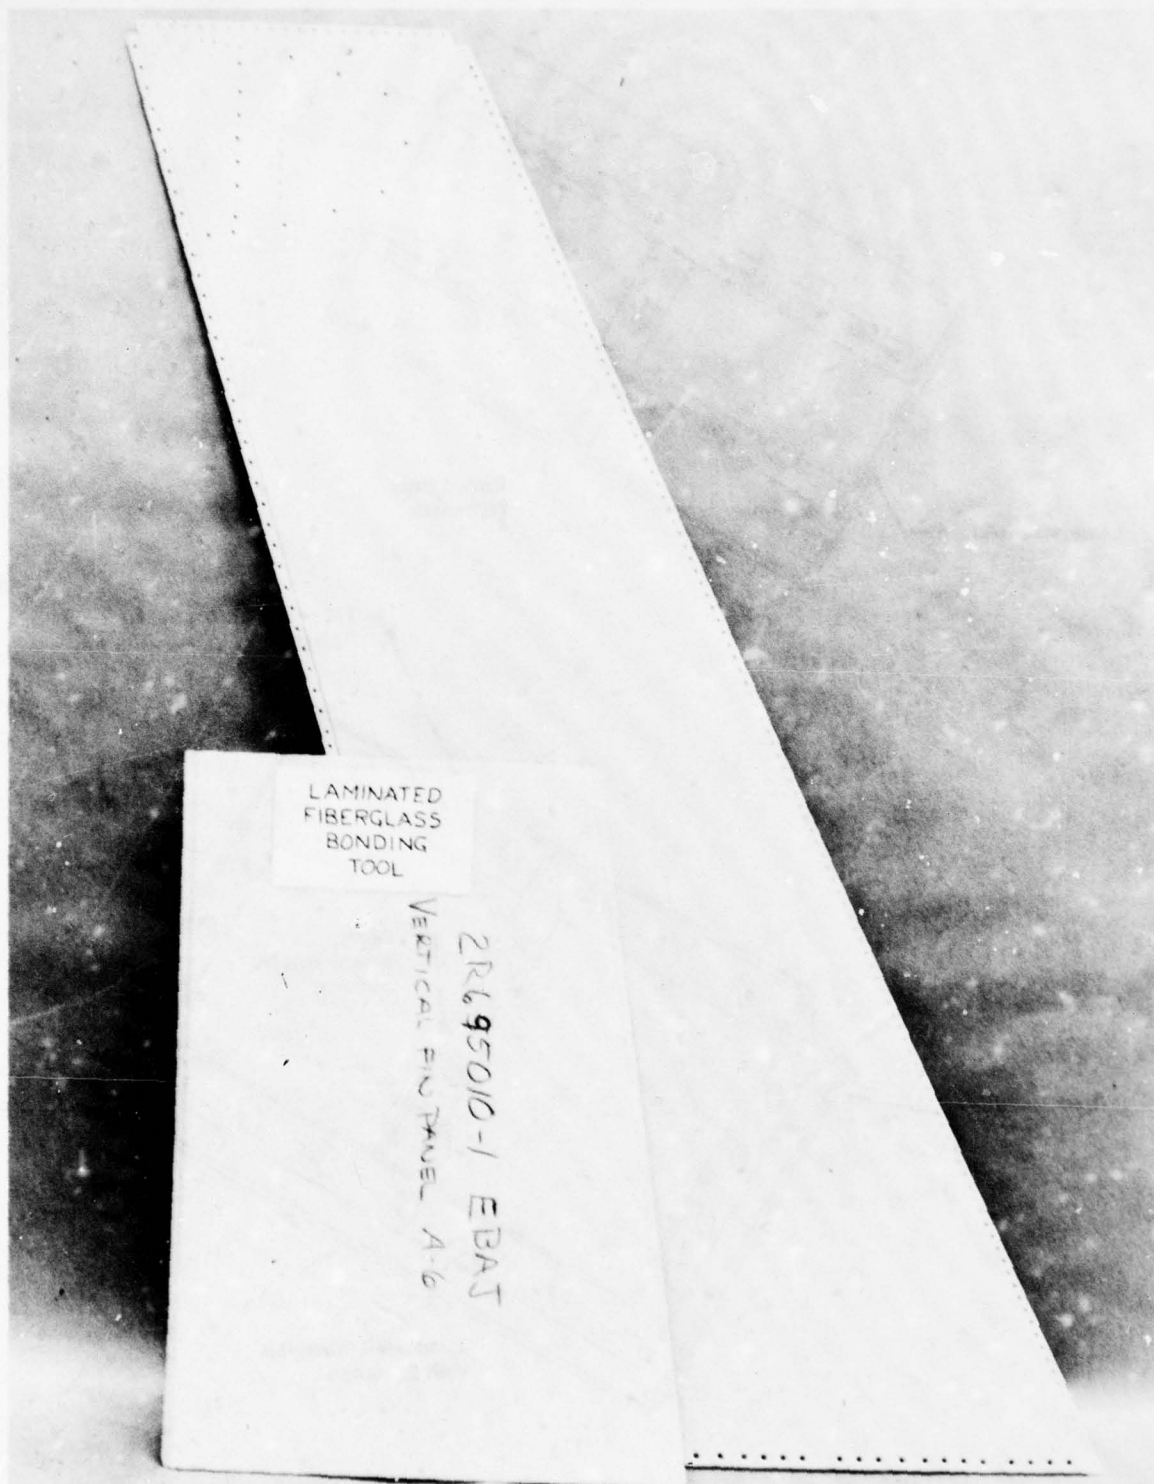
Completed Fiberglass Bond Tool and Repaired Fin Panel
